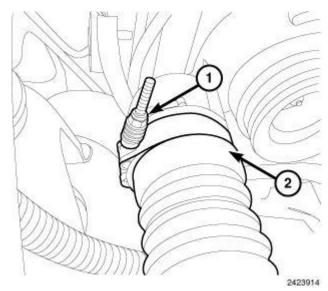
Charge Air Inlet Tube & Clamp Courtesy of CHRYSLER GROUP, LLC
